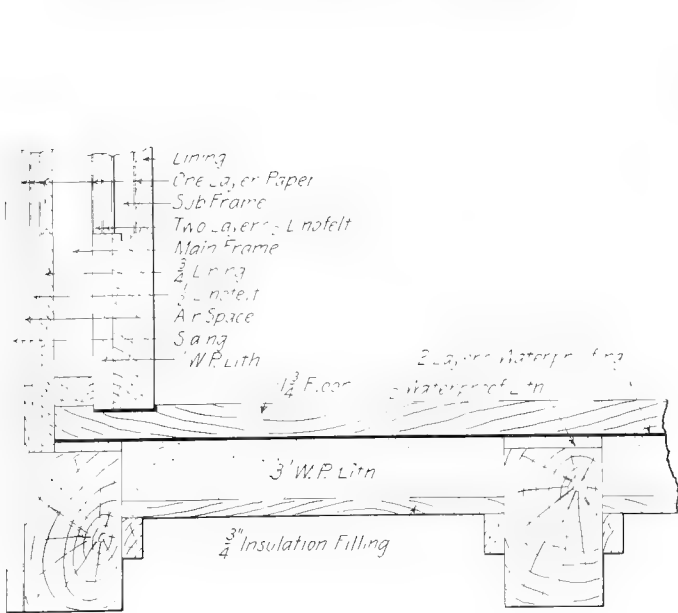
Detail of Improved Refrigerator Car Insulation. Union Fibre Company.
